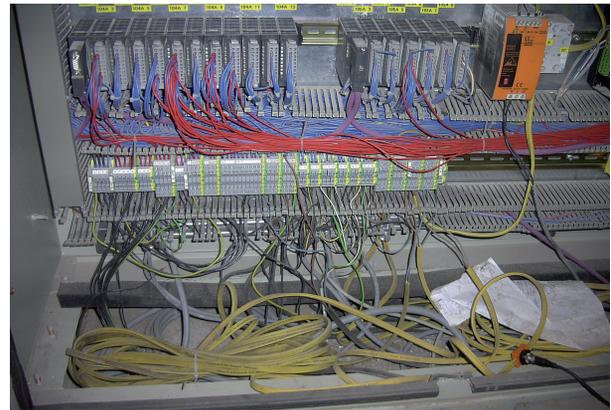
Internal view of the control cabinet – excessive AS-interface flat cable
